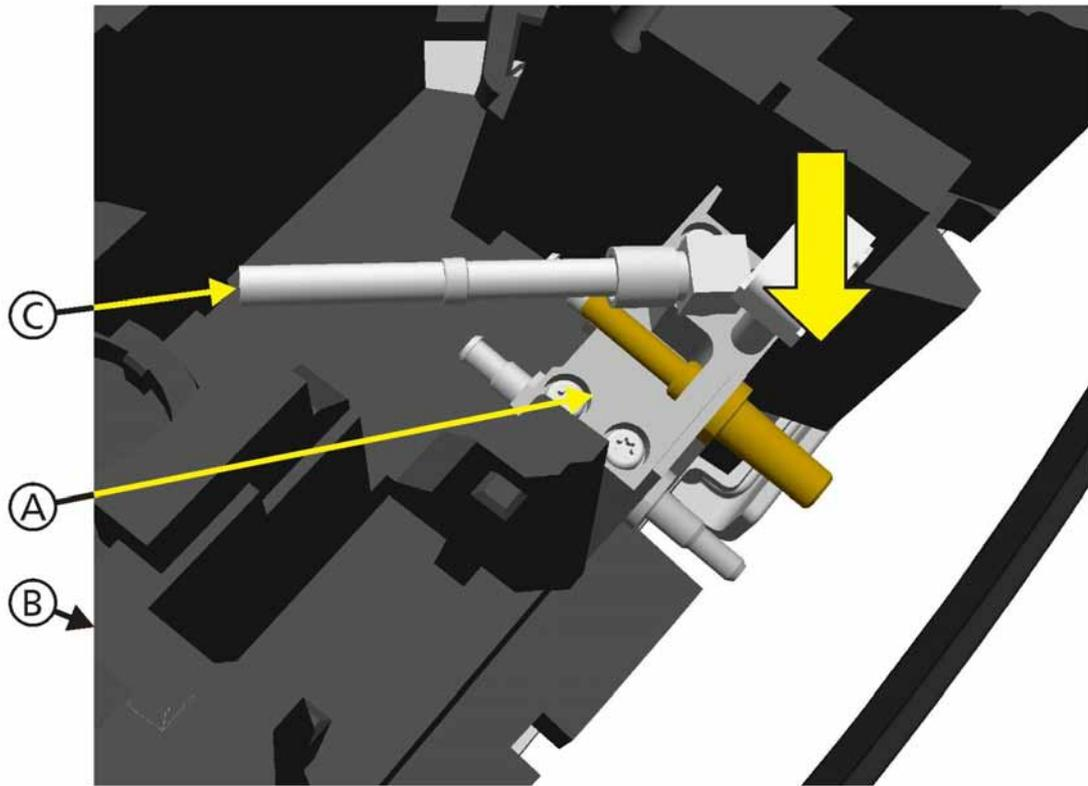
Front Panel Connector Block and Tubing Assembly, Step 1
